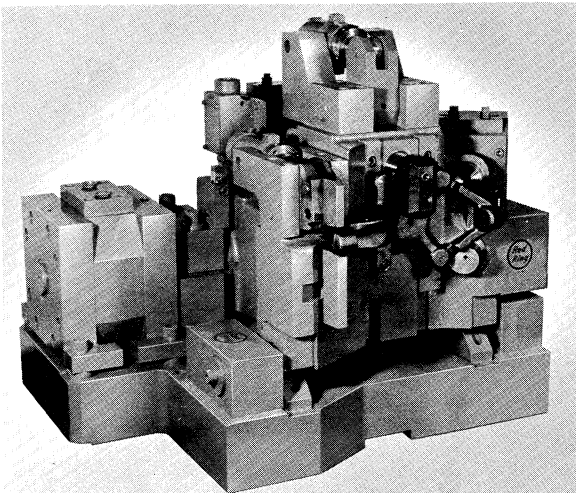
Red Ring fixture for surface-broaching a ball joint steering knuckle uses hydraulic actuators and cylinders to clamp the part, and tip up the fixture for unloading.
